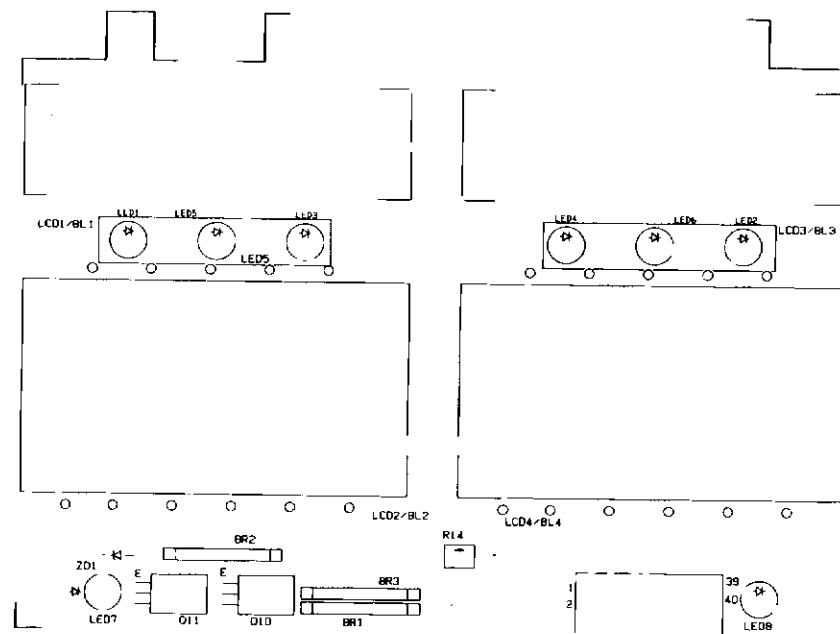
Display CCA, Solder Side (Sheet 2 of 2)
